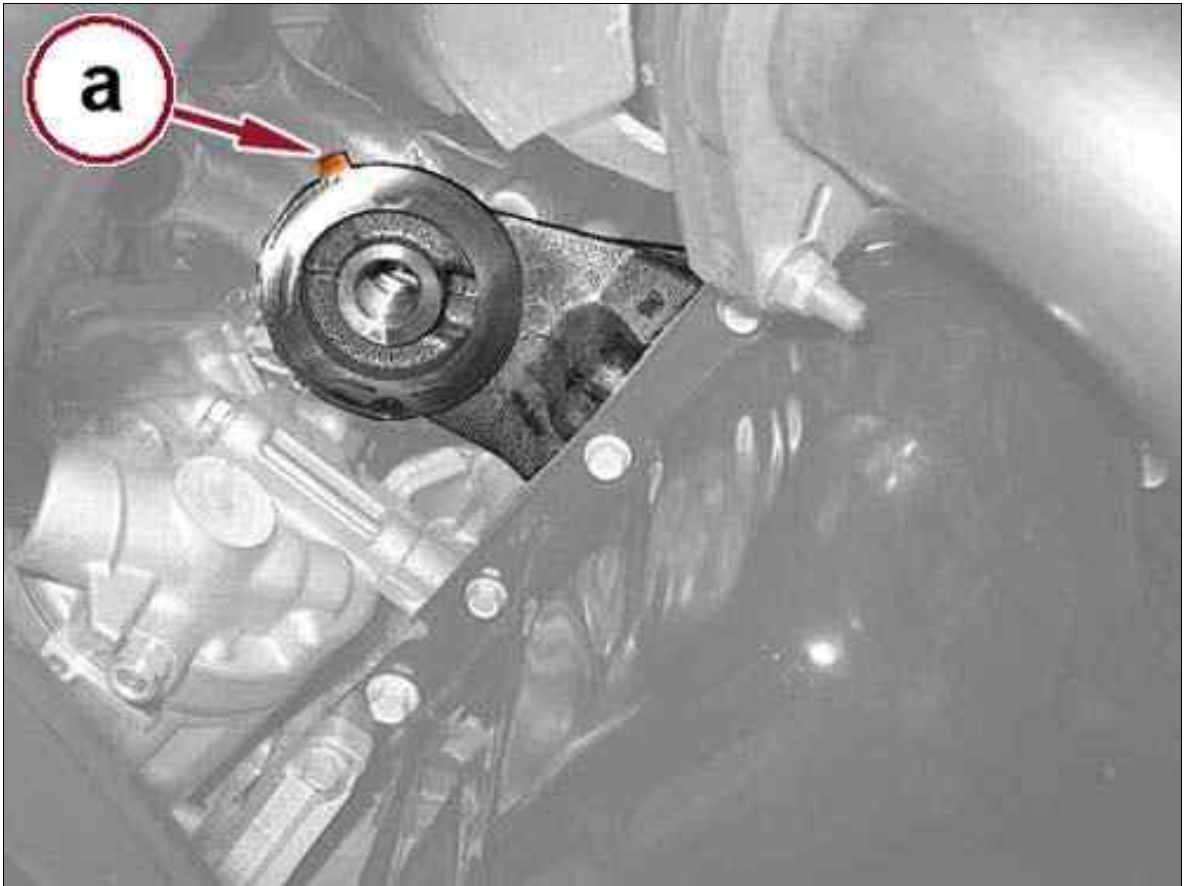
Coolant Tube, Water Pump Body, Nuts & Bolts
